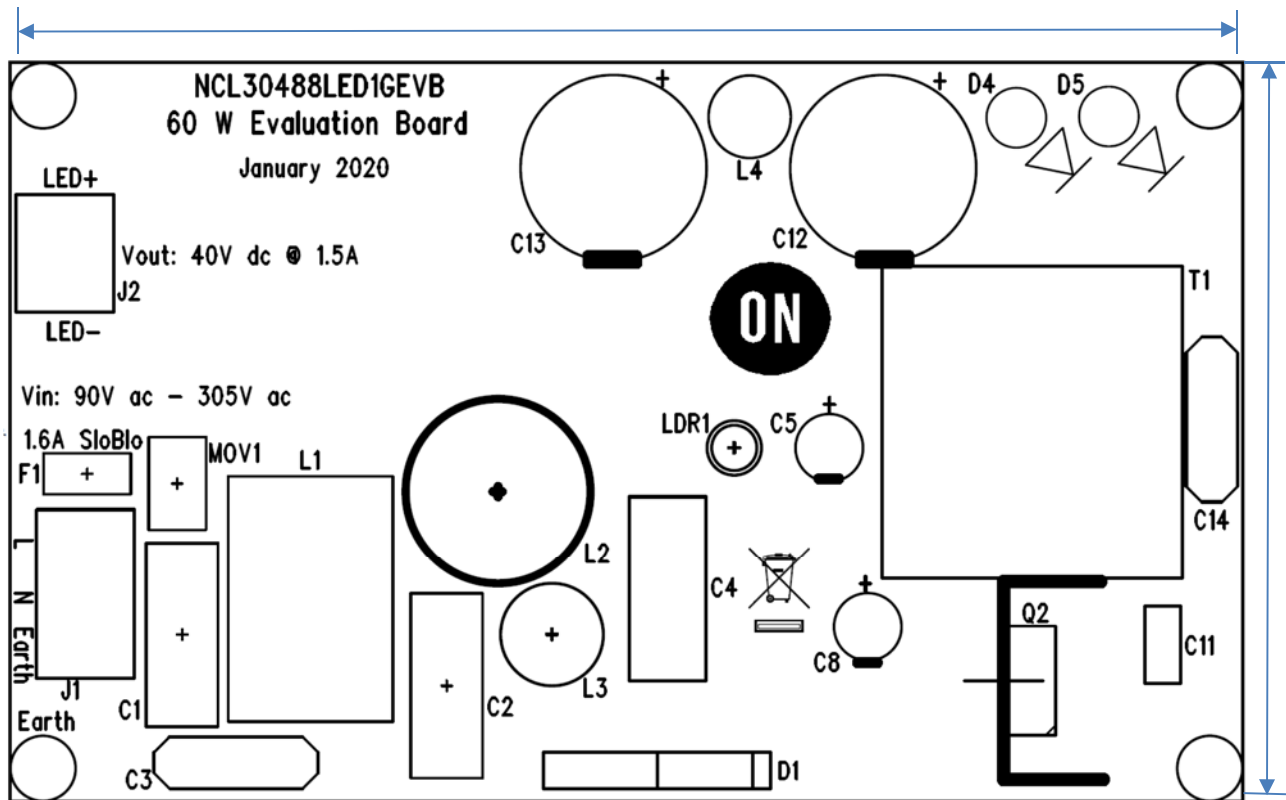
PCB Outline and Top Silkscreen (120mm x 72mm)
